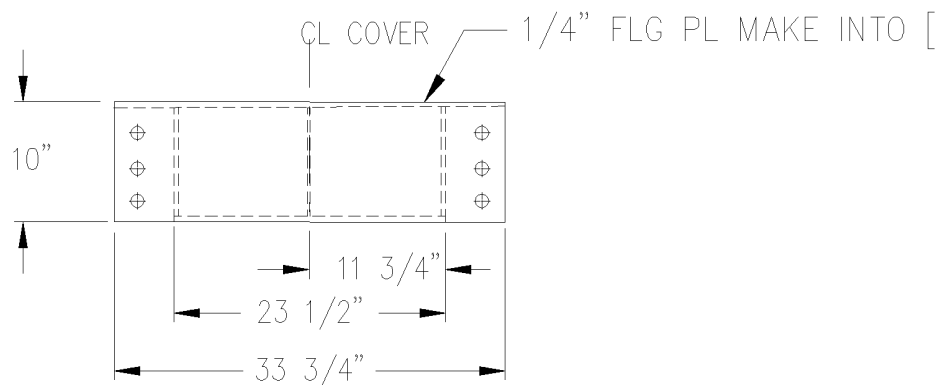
RCR Cover Weldment (Sheet 1 of 3)
